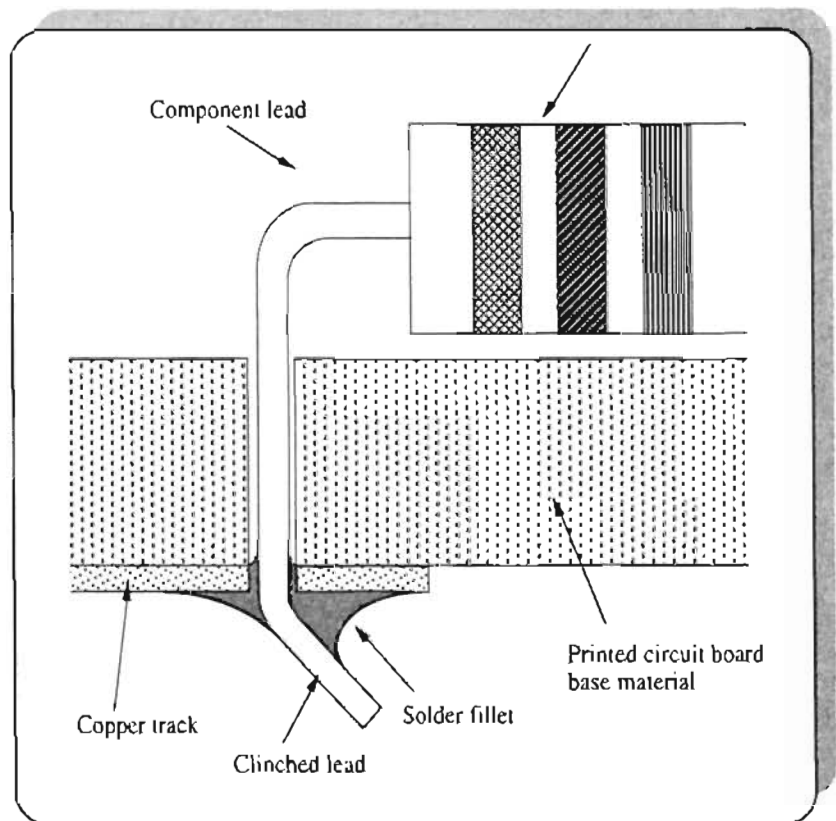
Non-plated through-hole, clinched lead printed circuit board joint
